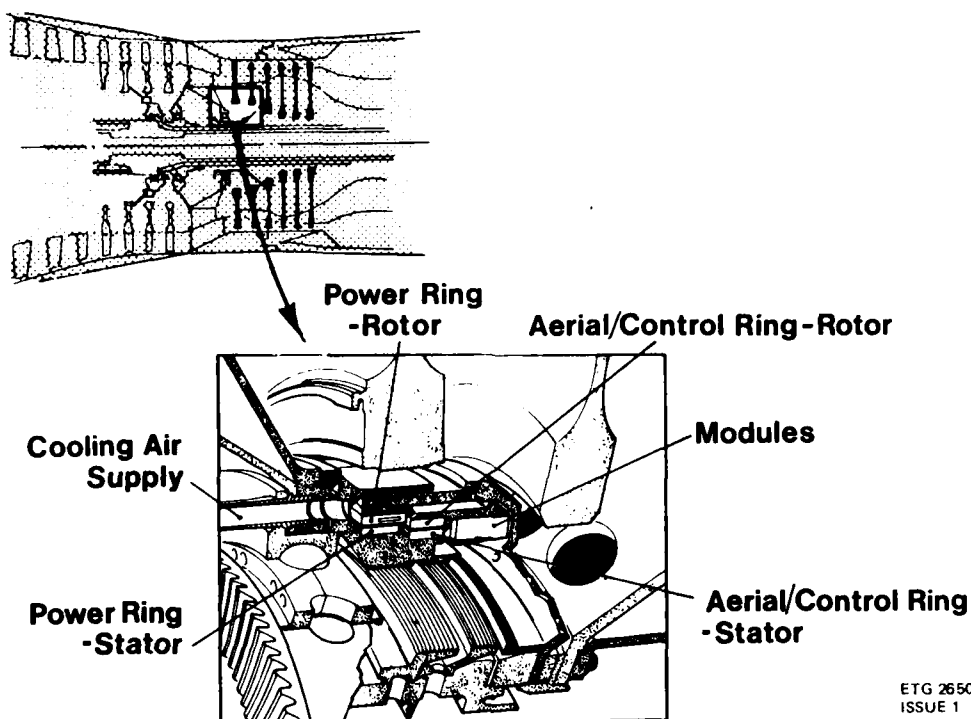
HP SHAFT SIGNAL LEAD OUT EQUIPMENT
